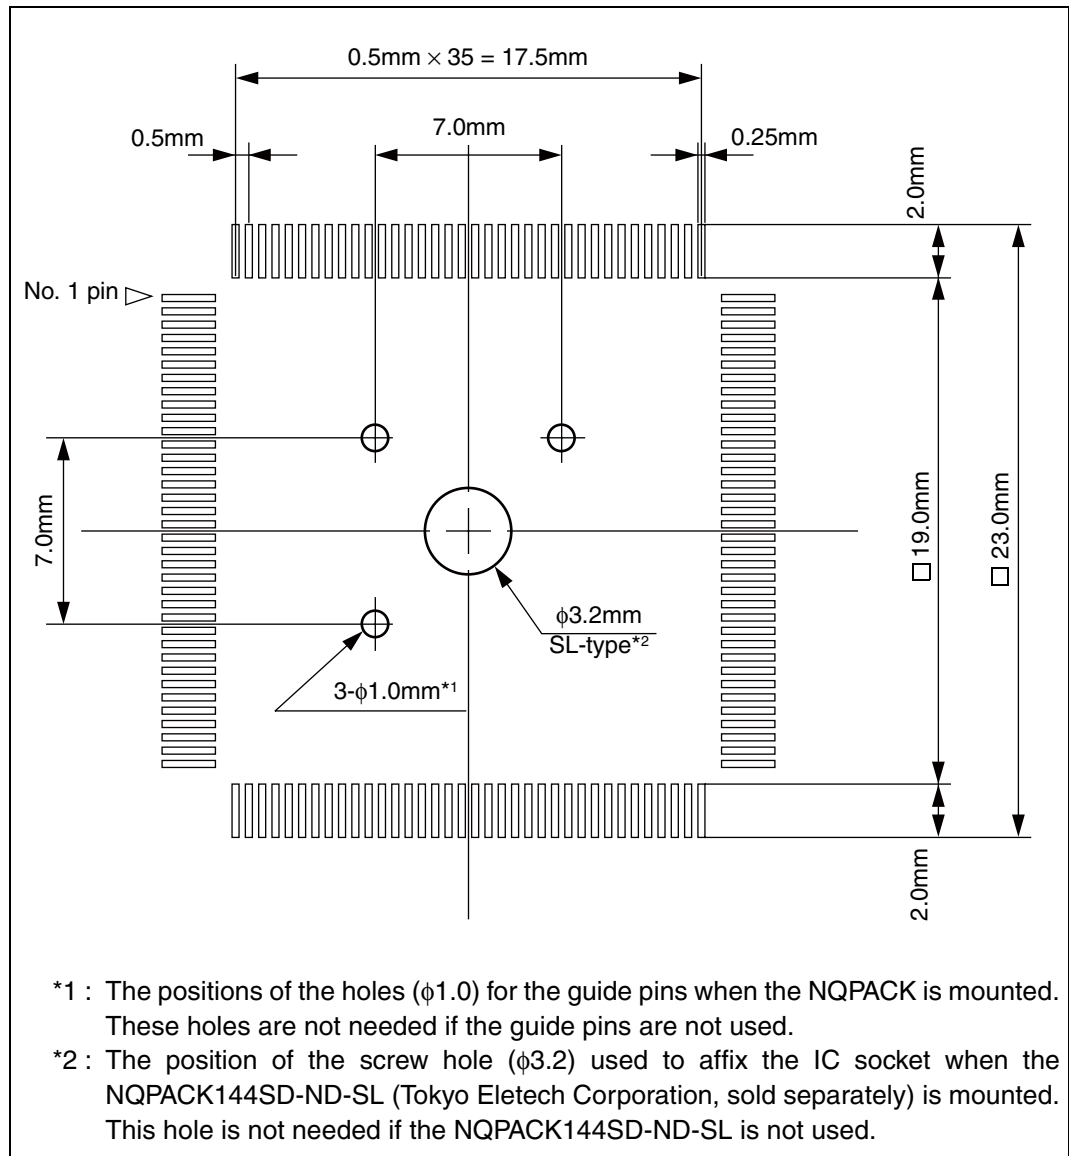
Recommended dimensions of the footprint for mounting the NQPACK
